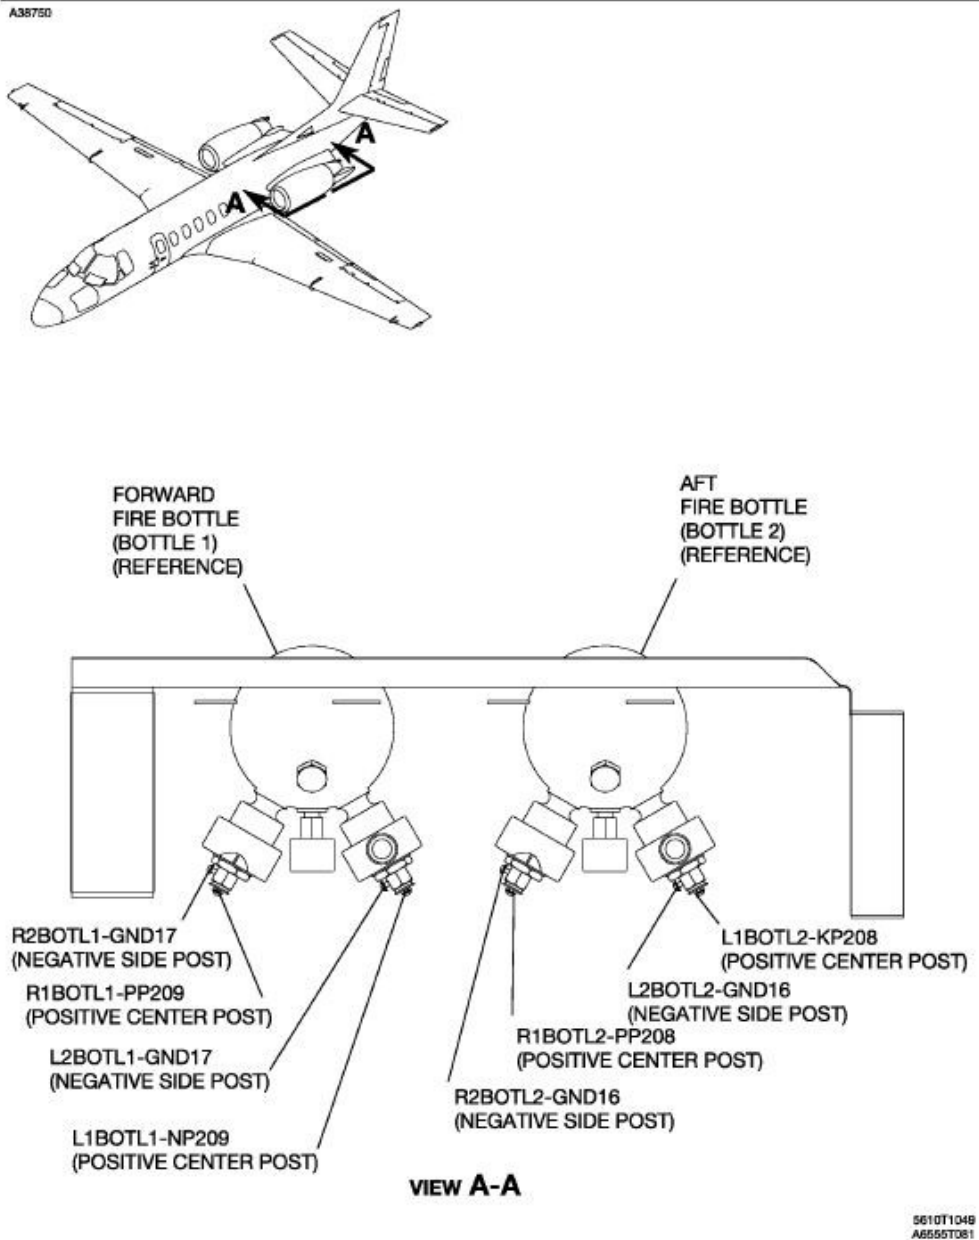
Fire Bottle ID Sleeve Installation (Sheet 1)
